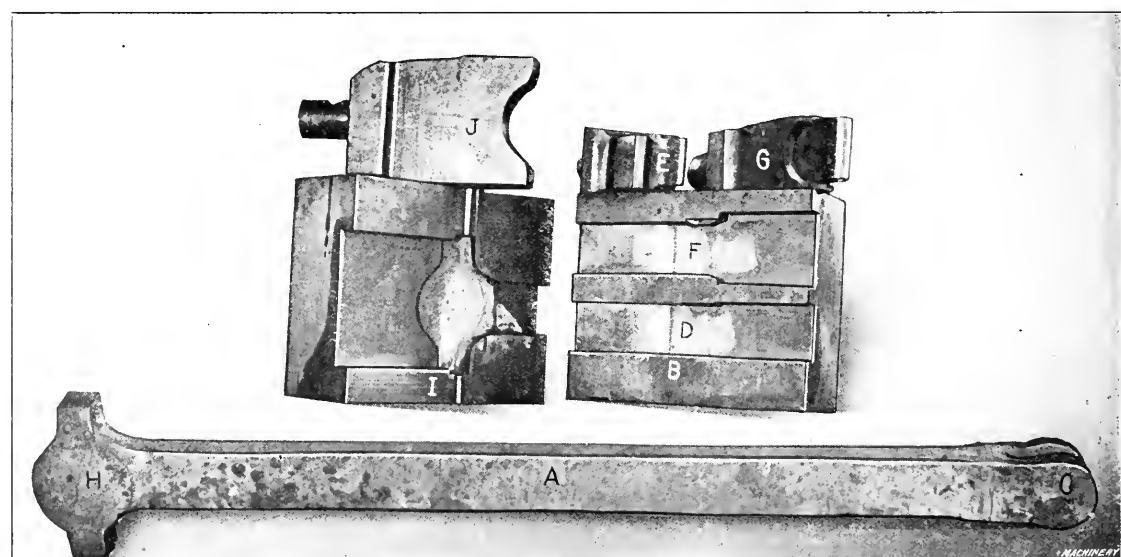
Dies and Tools used in the Ajax 6-inch Universal Forging Machine for making Locomotive Side Rods in the C. & N. W. Railway Shops
